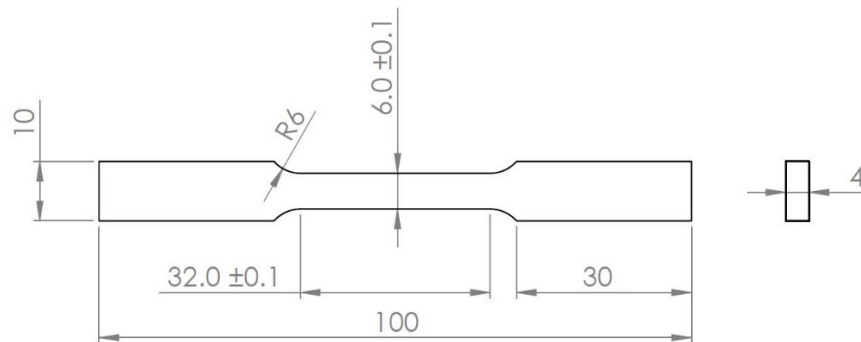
Dimensions (in mm) of the tensile specimens used for RT tensile testing, conforming to ASTM E8/E8M subsize standard.
